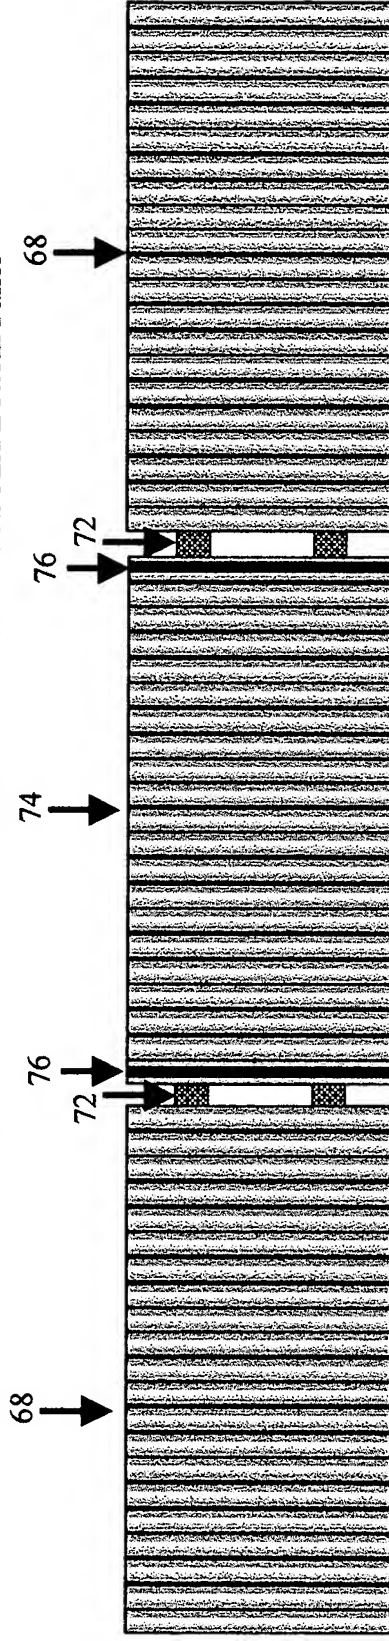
Overhead View Of Unfolded End Panels And Bottom Panel
